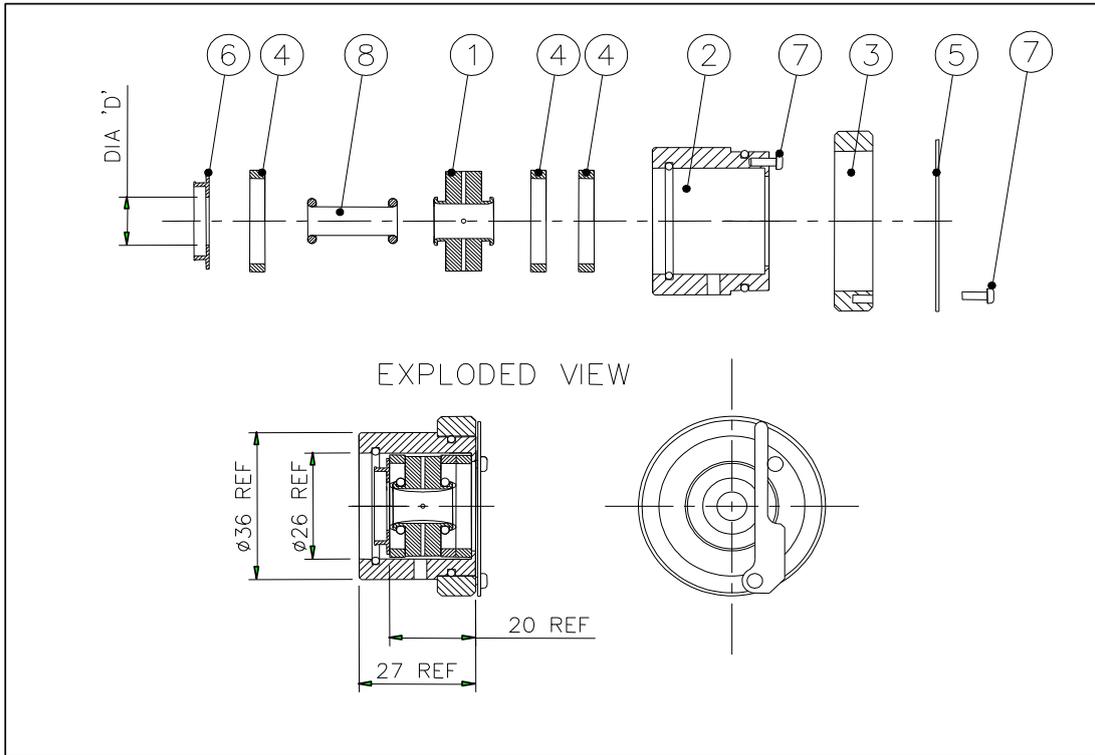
Example of Holder assembly for Cigars \varnothing 16.5 to 22.49 mm (Construction Type 2 for ventilated cigars)
